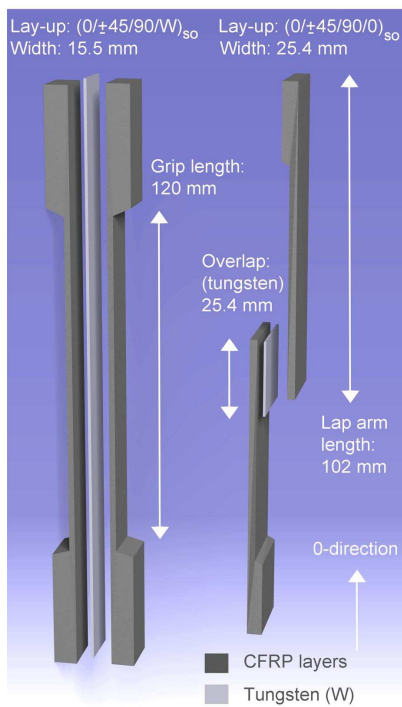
CFRP–tungsten specimen configurations and nominal dimensions for tensile testing (ASTM D 3039) and single-lap shear testing (ASTM D 5868).
